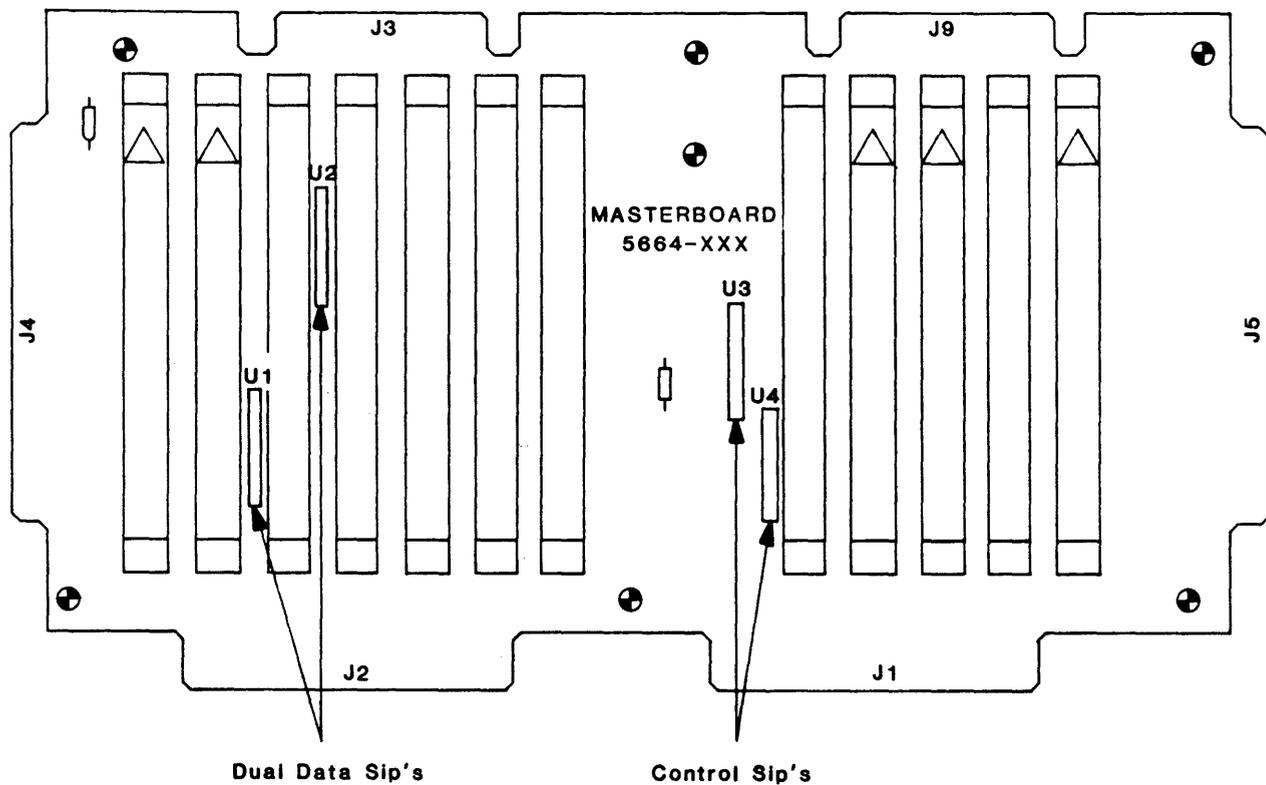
9100/9300 Drive Master Board, Terminator Single In-line Packages (SIP's)
